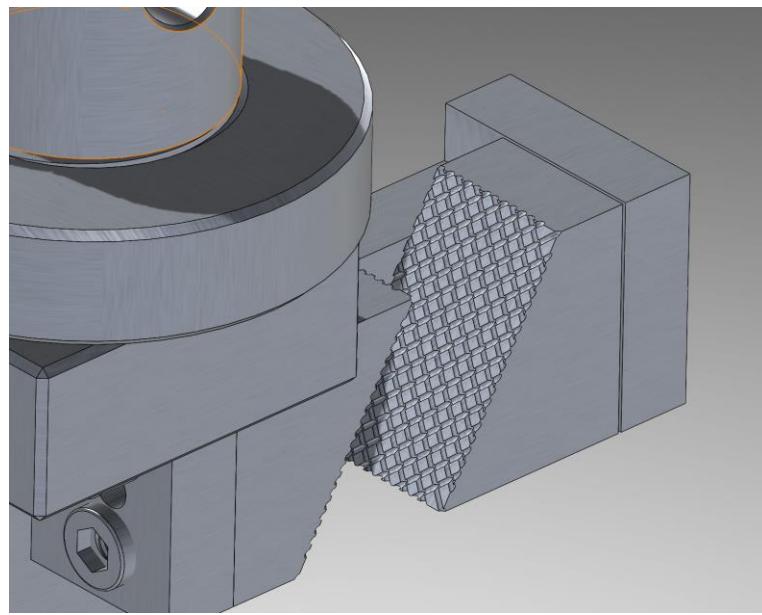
Final Design – SolidWorks Clamp Jaw Close Up View
